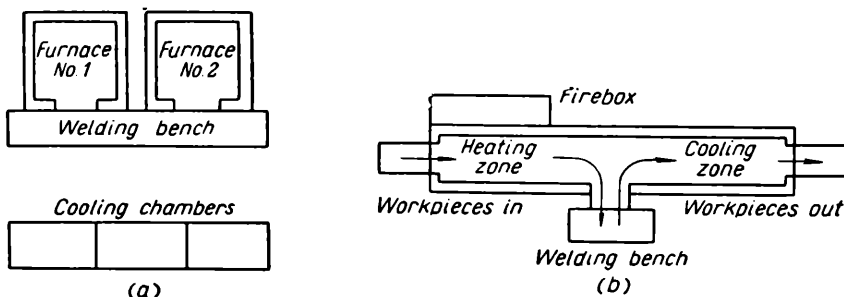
Location of furnaces for preheating cast-iron workpieces:
